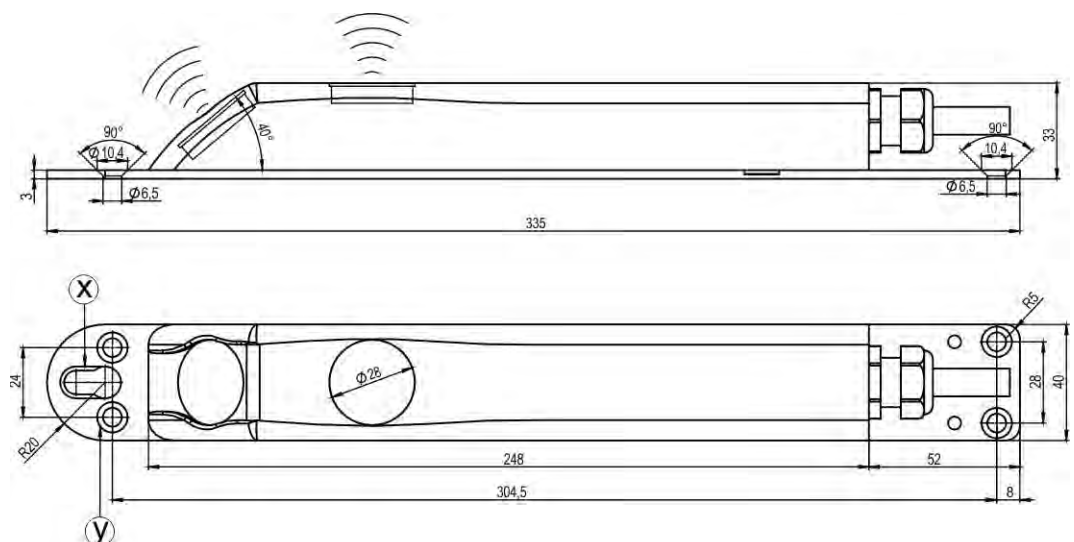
Dimensioned drawing pipe sensor CS2-....R
